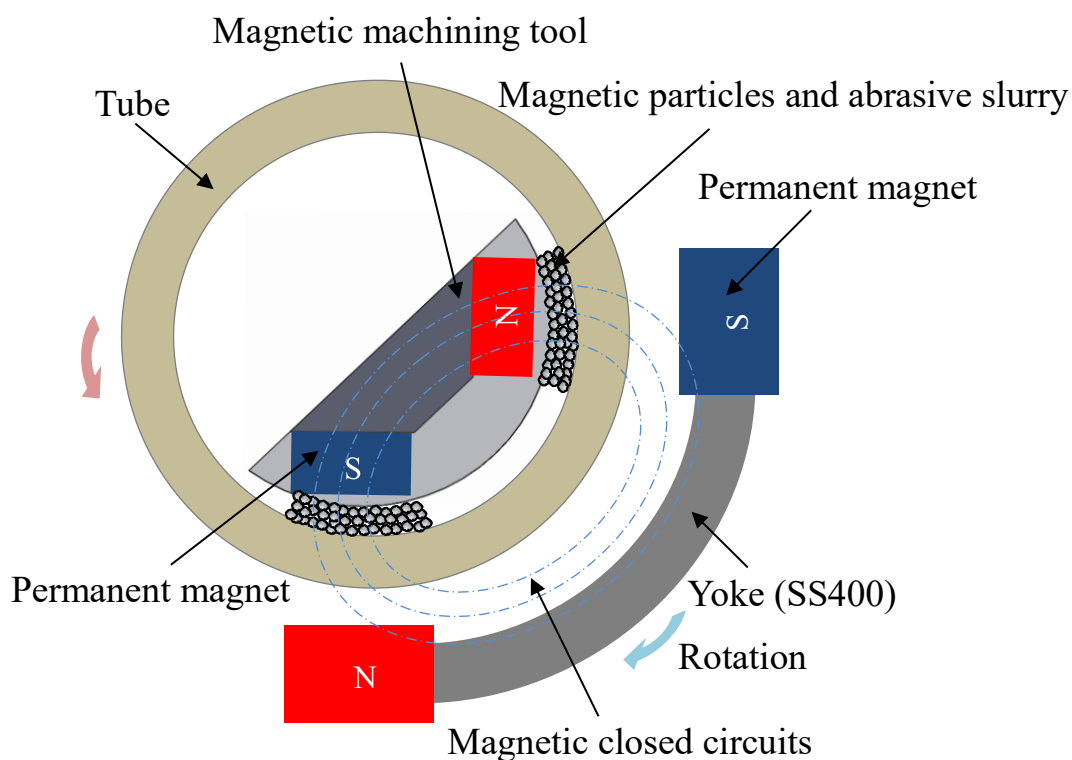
Two-dimensional schematic of internal magnetic abrasive finishing process using magnetic machining tool
